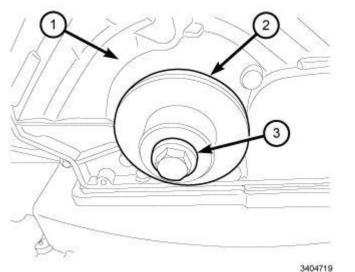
Front Seal Installer Tool & Vibration Damper Bolt Courtesy of CHRYSLER GROUP, LLC
